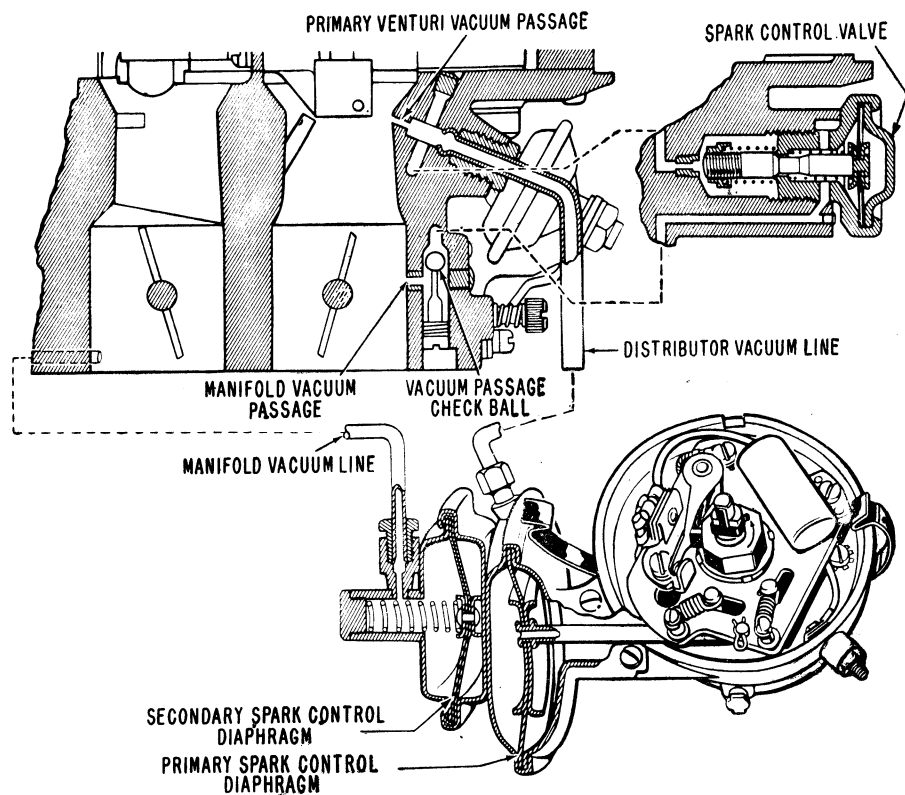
Showing vacuum-operated spark control valve attached to carburetor throttle body to control manifold vacuum to the distributor and regulate spark advance. Holley "full vacuum" distributor
